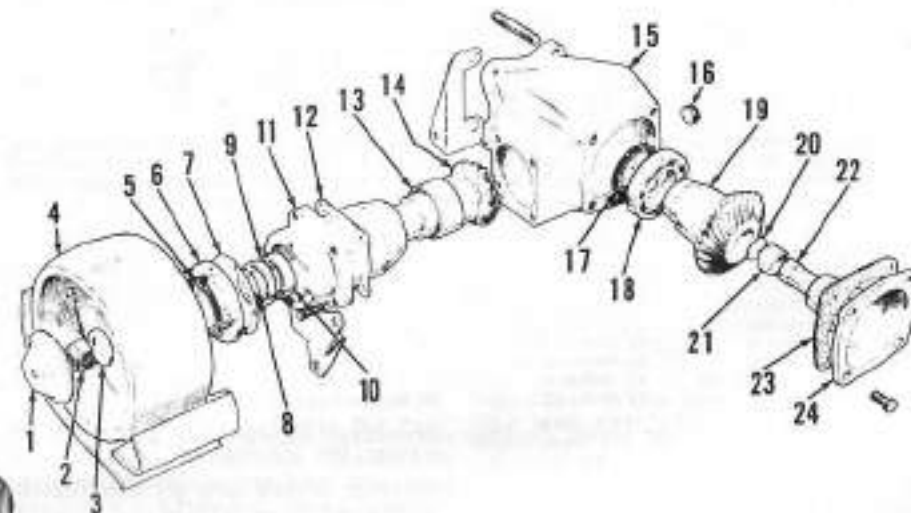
Exploded view of belt pulley assembly for models 780, 880, 990, 3800 and 4600. Gear backlash is adjusted by varying shim (12) thickness and output gear (14) end play is adjusted by varying thickness of shims (8) between roller bearing (9) outer race and retainer (6).
